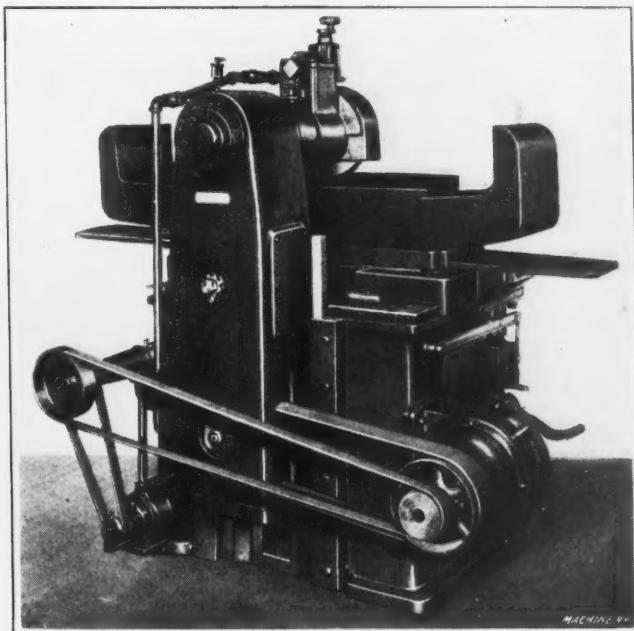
Rear of Machine illustrated in Fig. 1, showing Integral Construction of Wheel-head and Column
